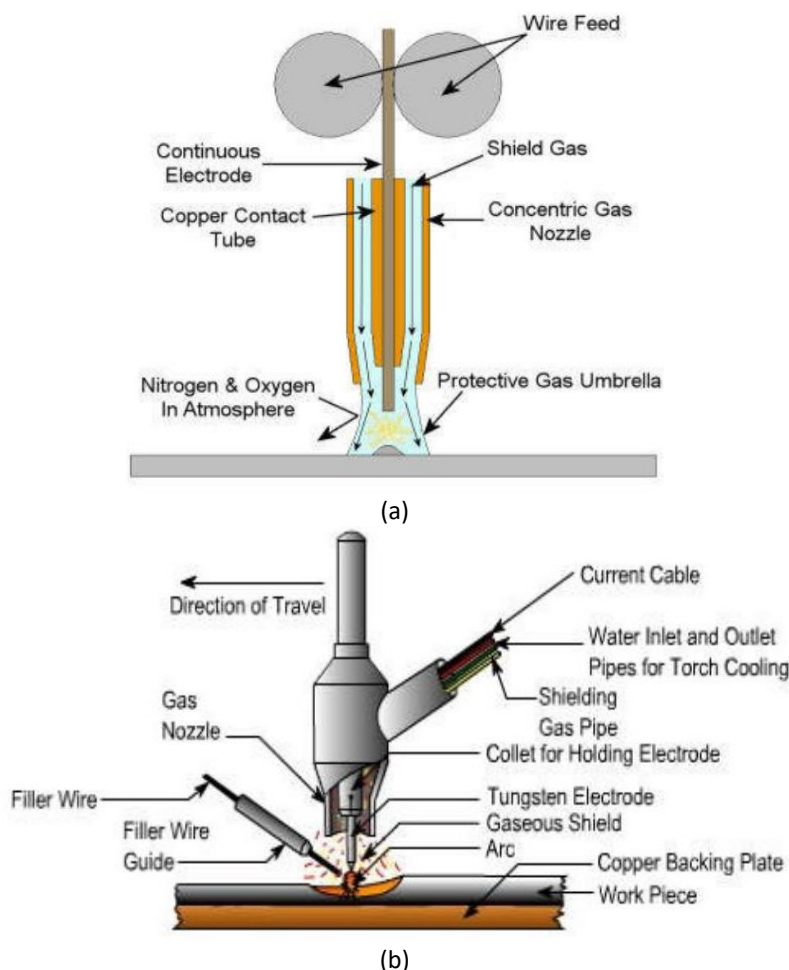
(a) Principle of MIG welding (b) Principle of TIG welding
